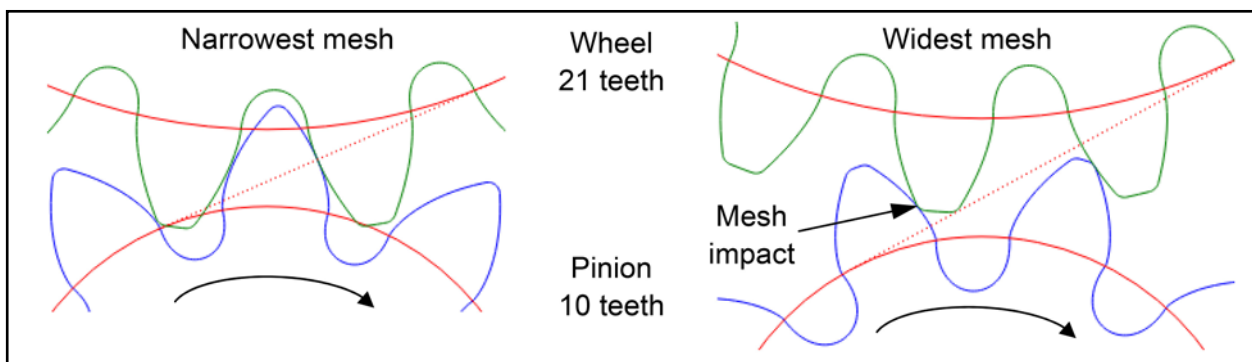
Conventional design, similar to DIN 58400 (Ref. 2).
